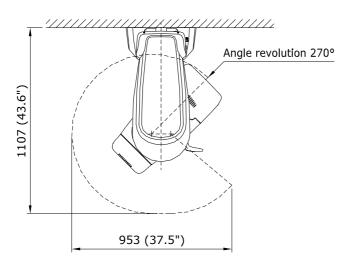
X-MIND prime 3D dimensions – Wall mounted with floor support version
